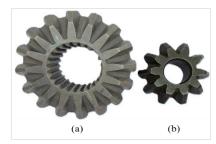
Photograph of (a) the Workpiece straight bevel gear and (b) honing (pinion) gear.
